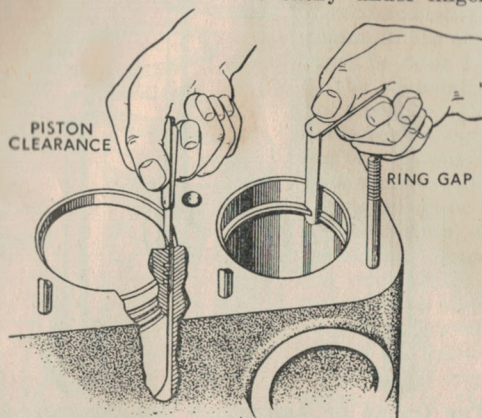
CHECKING THE GAP BETWEEN THE PISTON AND THE CYLINDER WALL
